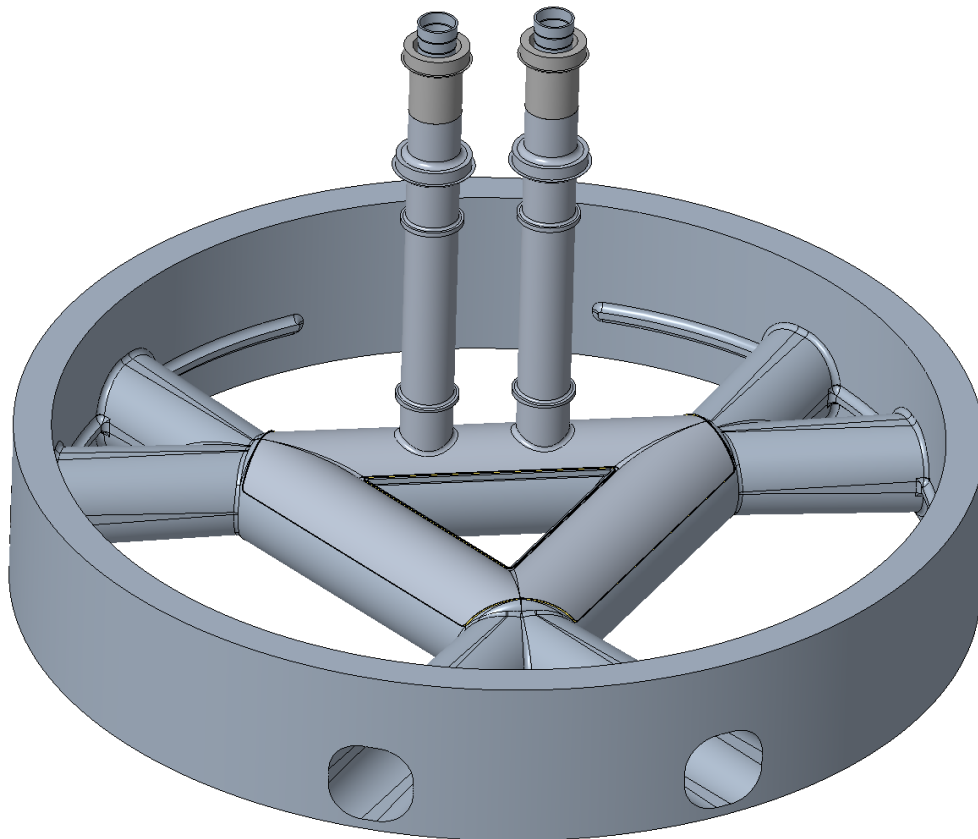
Vacuum Vessel Weldment after all final machining
